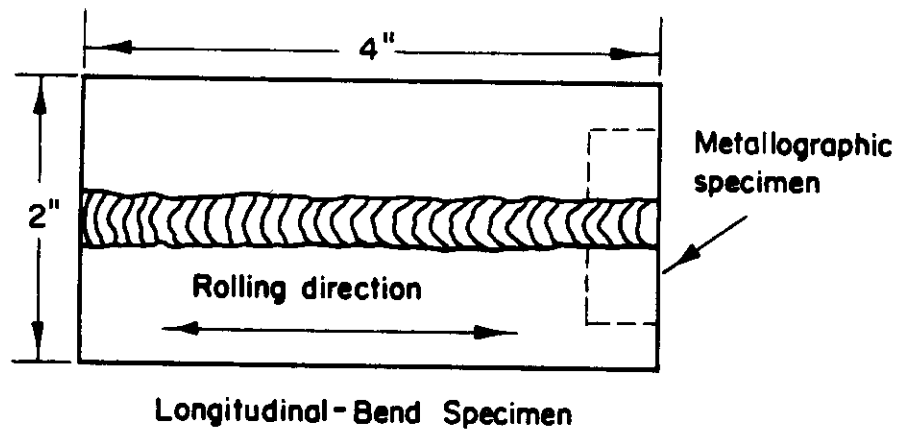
ORIENTATION OF TEST SPECIMENS IN $\frac{1}{10}$ -INCH-THICK WELDED SHEET
